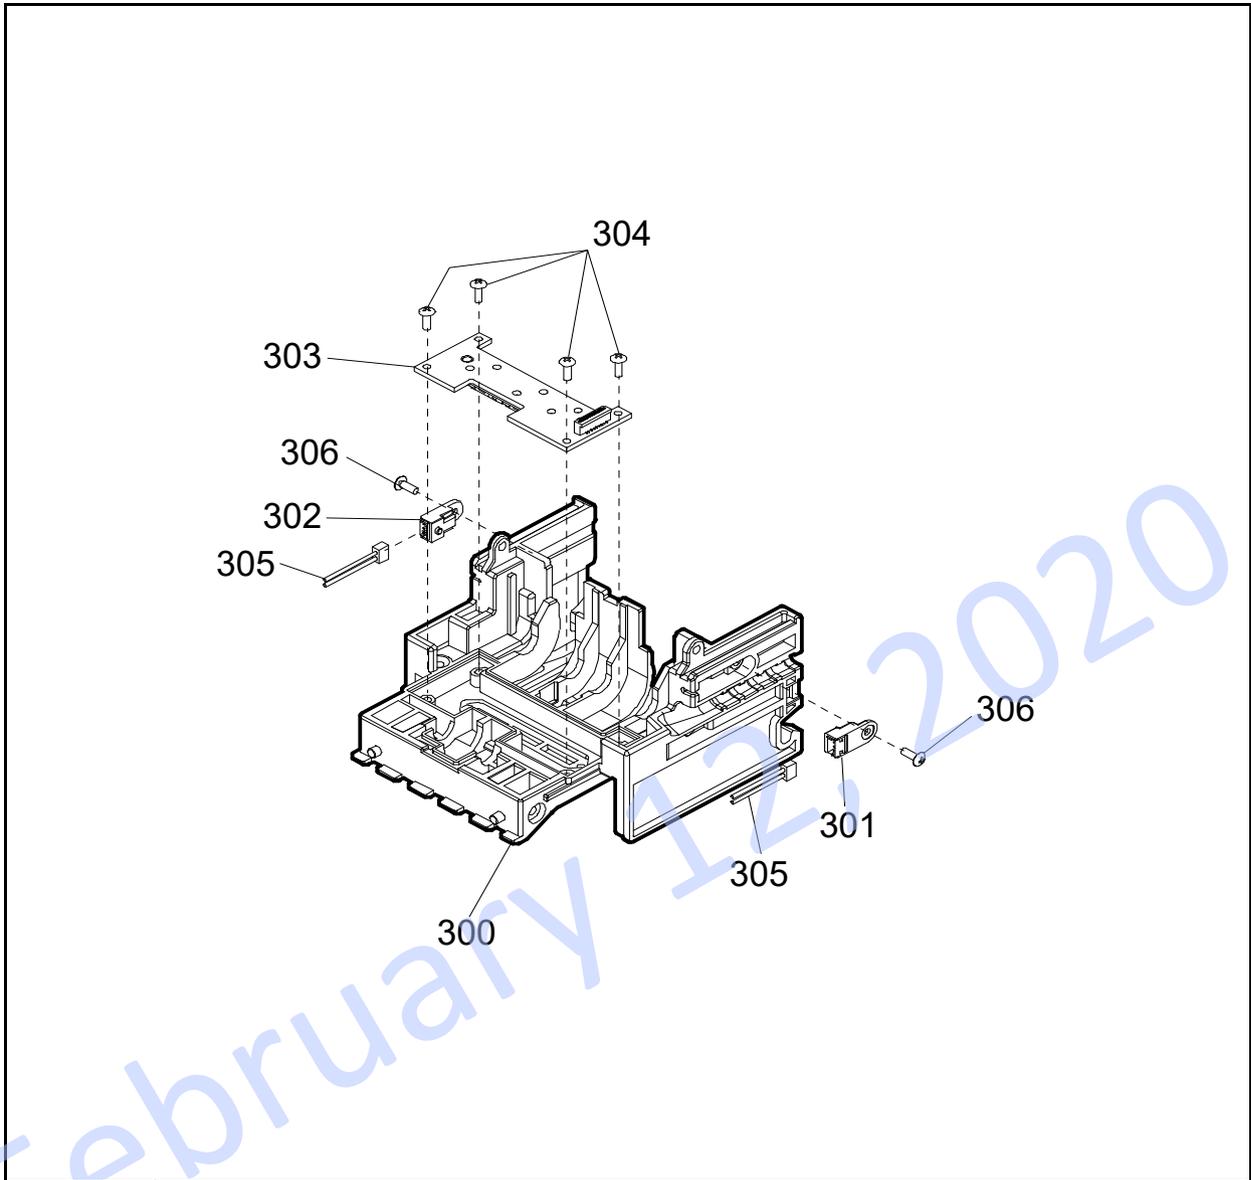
DBV-400 Validation Guide Cover Assy. Exploded View
